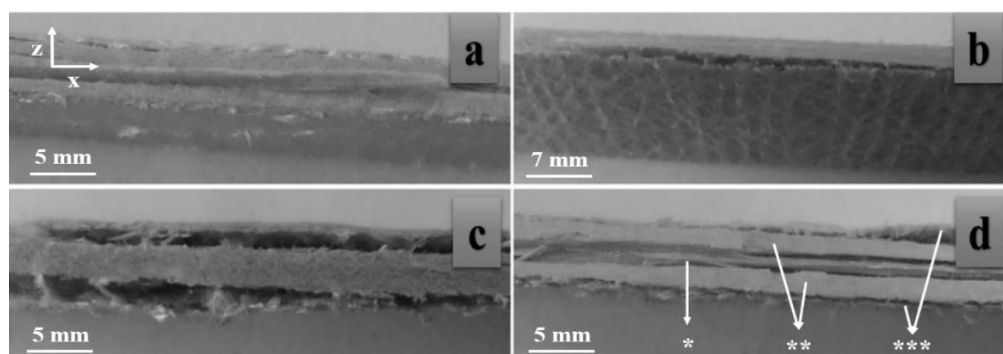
The tensile fracture surfaces of the neat specimen (a, b) and exposed specimen after 4 weeks of immersion at 70 °C (c, d) in the thickness zone. The middle layer-a mat (*), woven roving glass fiber layer (), and outermost mat layer (*).
